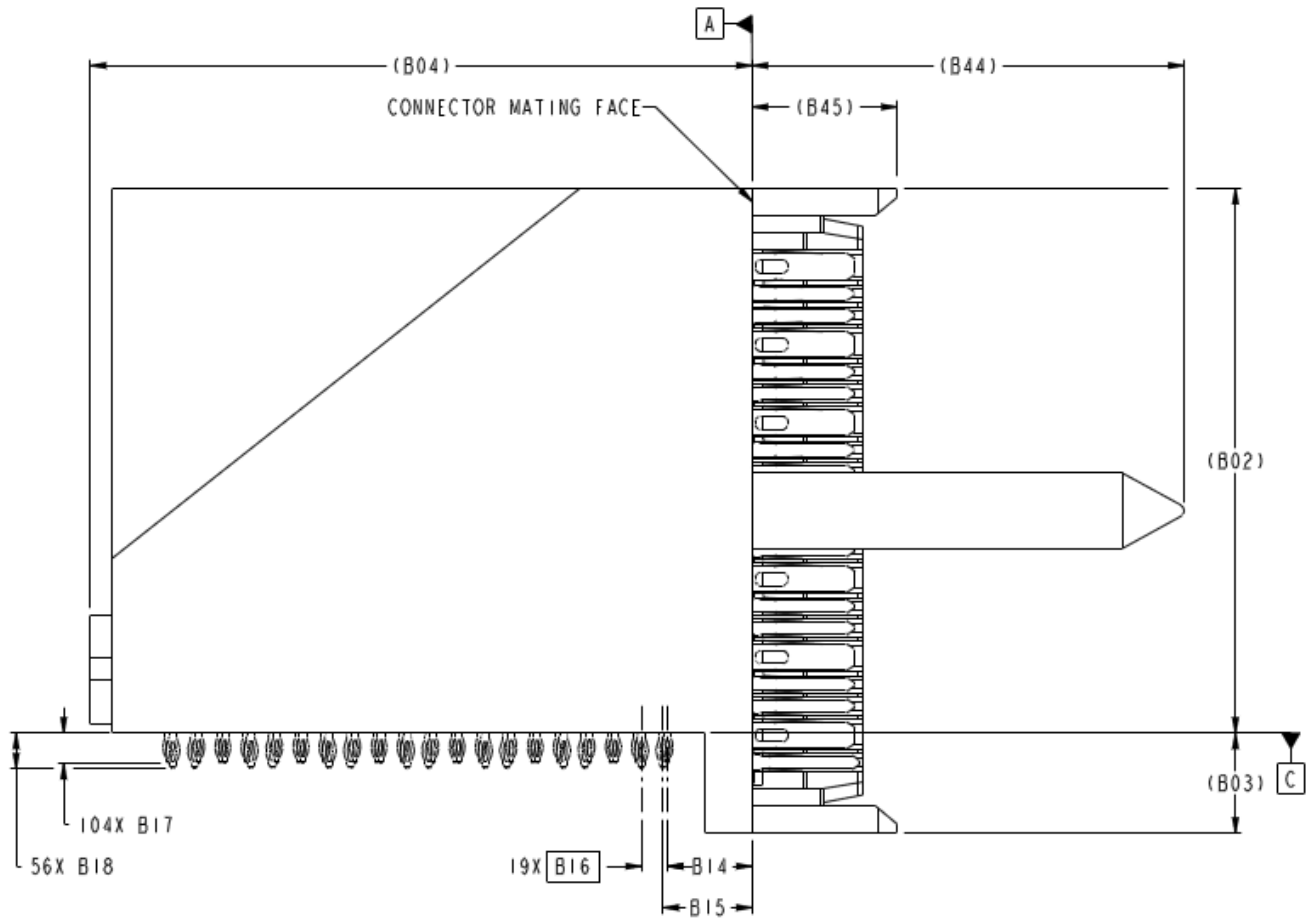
Right Angle Header Right Guidance Connector Side View
